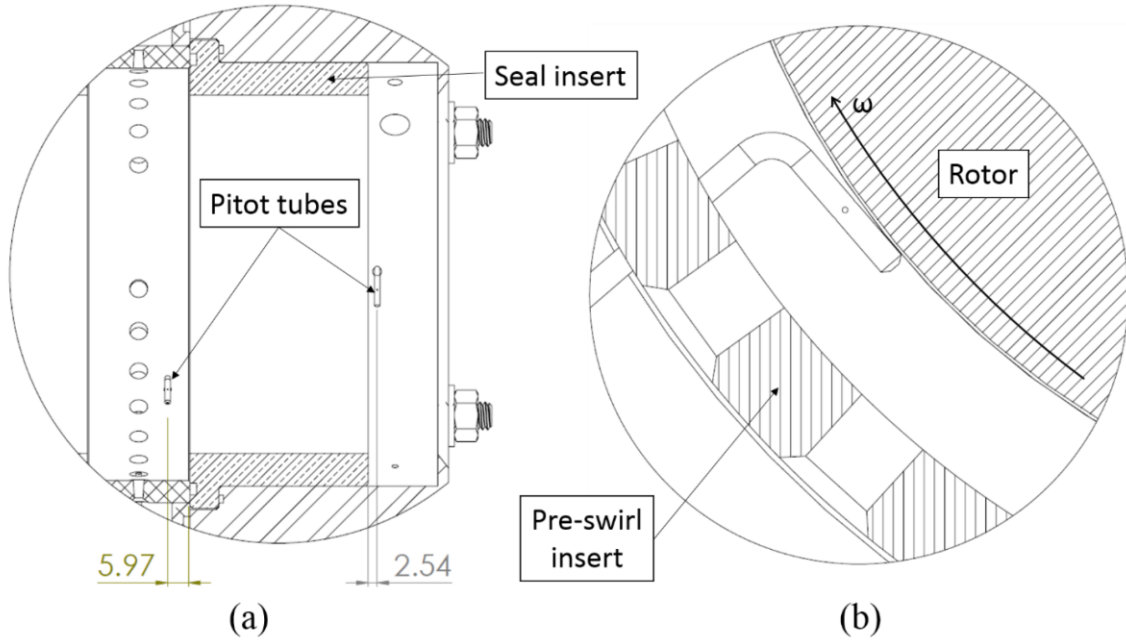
Cross-section of the stator showing (a) axial and (b) radial position of the pitot tubes. All dimensions are in millimeters. Adapted from Moreland [8].
